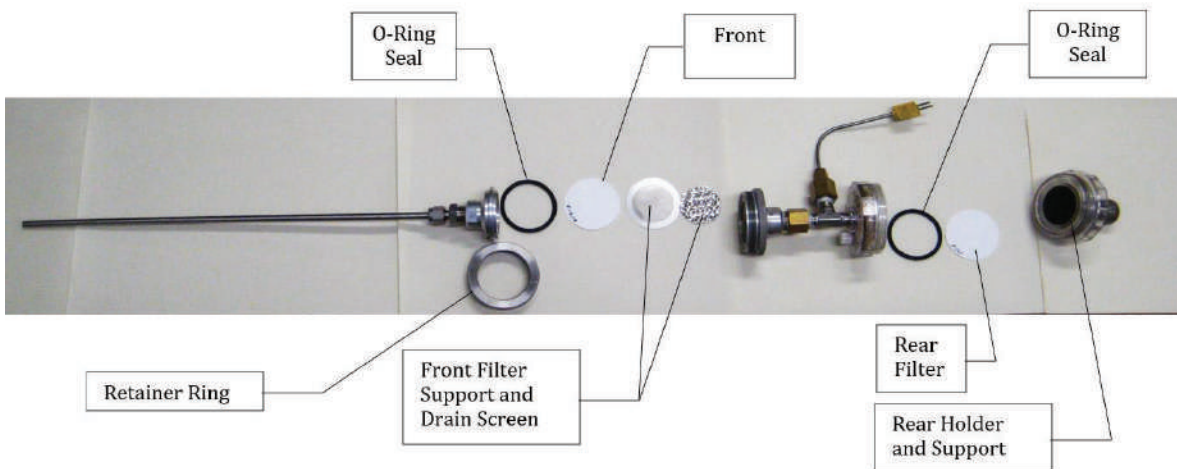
Sample Probe Assembly as specified in ASTM E2515-11
